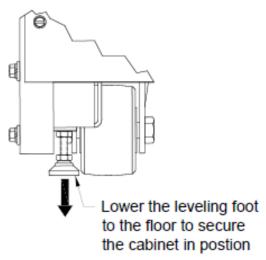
Leveling Foot Being Adjusted Down To Floor
